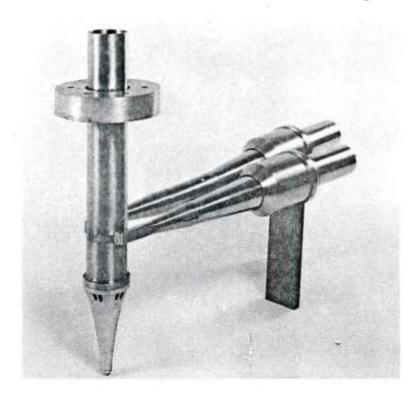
Acoustic system for an ultrasonic ring welder.
